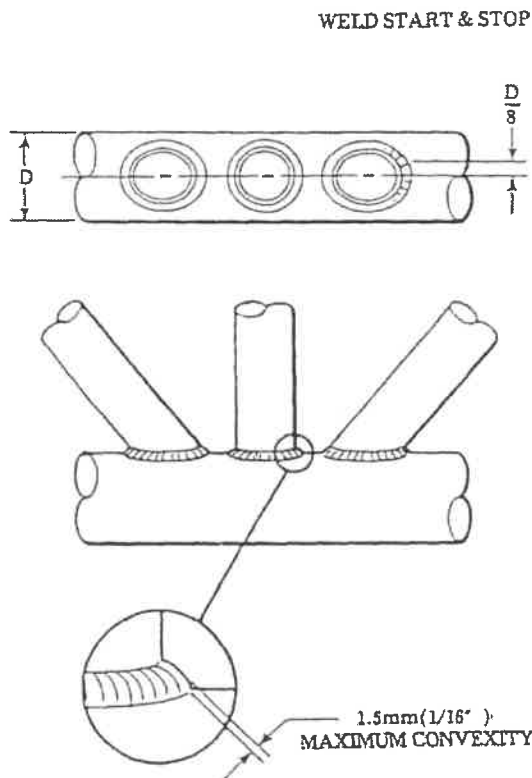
Welding Lacings to Tubular Chord
